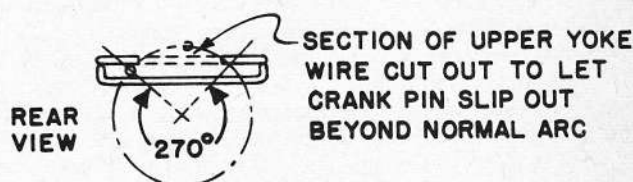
FAIL-SAFE ELEVATOR DETAILS
